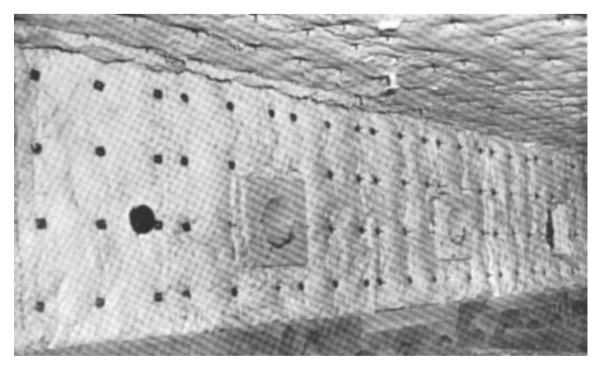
Plate mill continuous annealing furnace with fiber blanket wallpaper construction.
